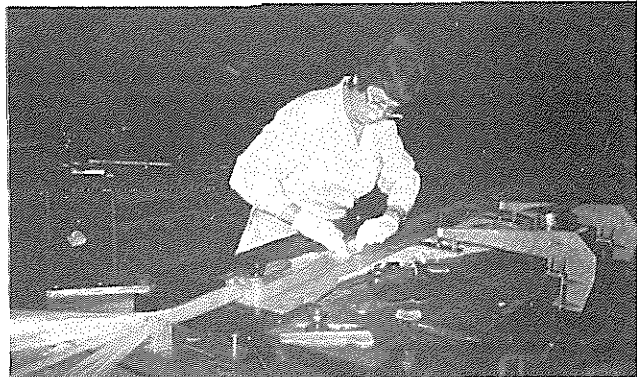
MANUAL ROTOR BLADE MANUFACTURE
